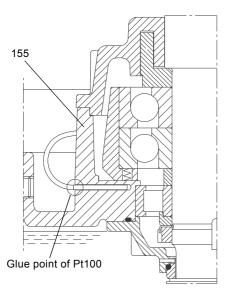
Pt100 in lower bearing bracket on pumps manufactured after 2010
